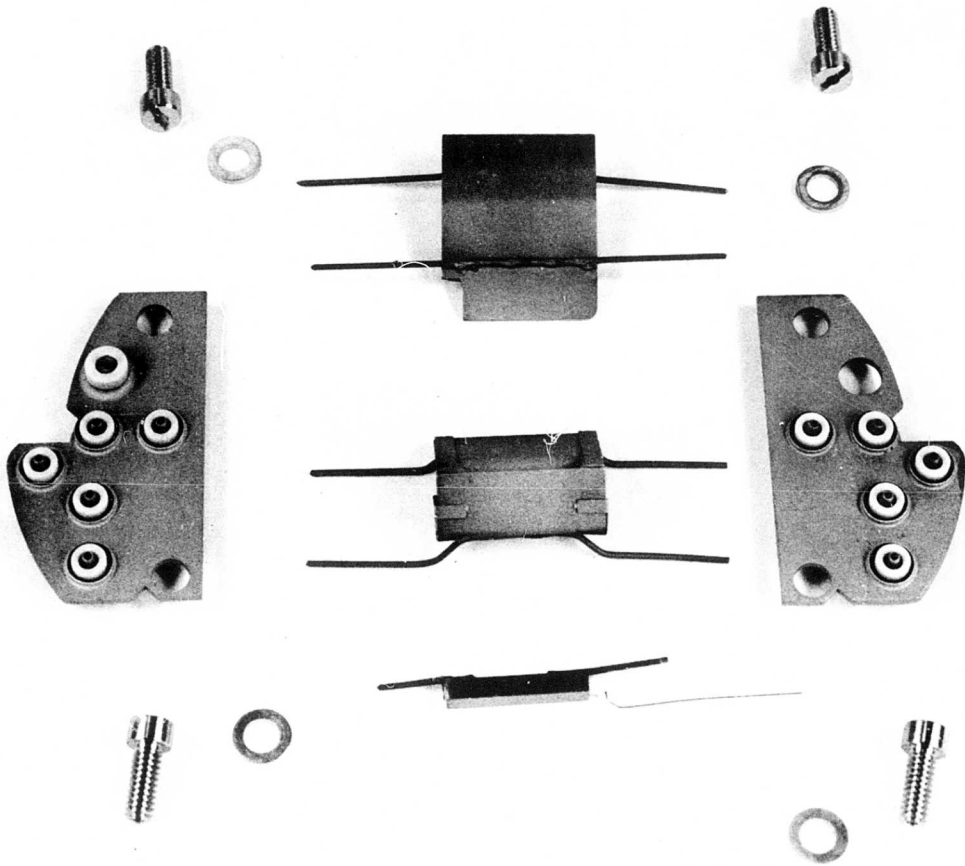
GUN ASSEMBLY COMPONENTS - QKA852
